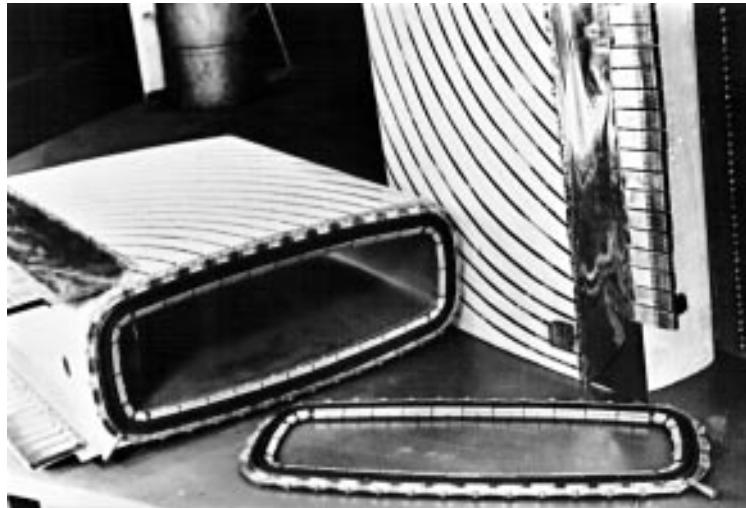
Porcelain vacuum sections at the centre of the Cee, showing the laminated silver coating leading out to the spring contacts of the sliding joint. Brass gasket plates with moulded rubber rings used for vacuum sealing can be seen. Electrical connection between the porcelain sections is effected by the two sets of spring contacts carried by each gasket [43].
